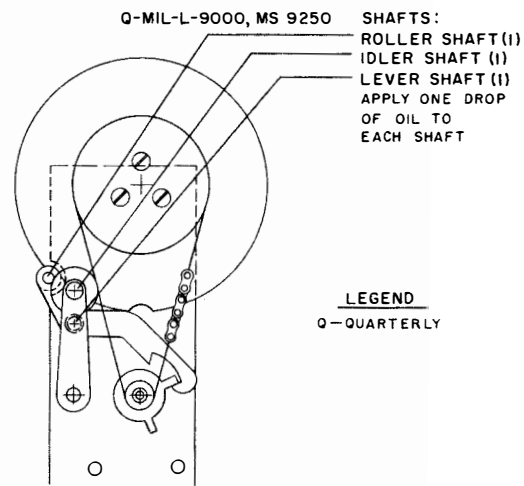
RFA, PA Dial Assembly, Lubrication
